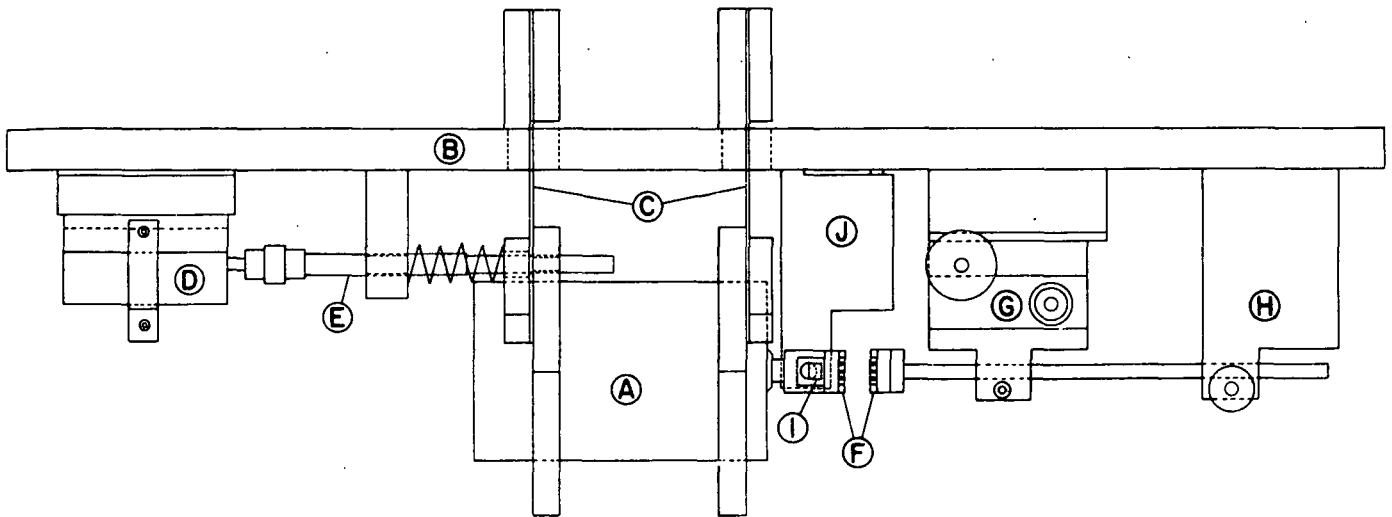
Side view of the Fiber Load/Elongation Recorder, Model II. Scale: 1 in = 5 in. A - electronic weighing cell, B - mounting plate, C - flexure springs, D - dc servo motor, E - differential screw, F - clamps, G - microscope focusing mechanism, H - clamp, I - transducer, and J - pillar.
